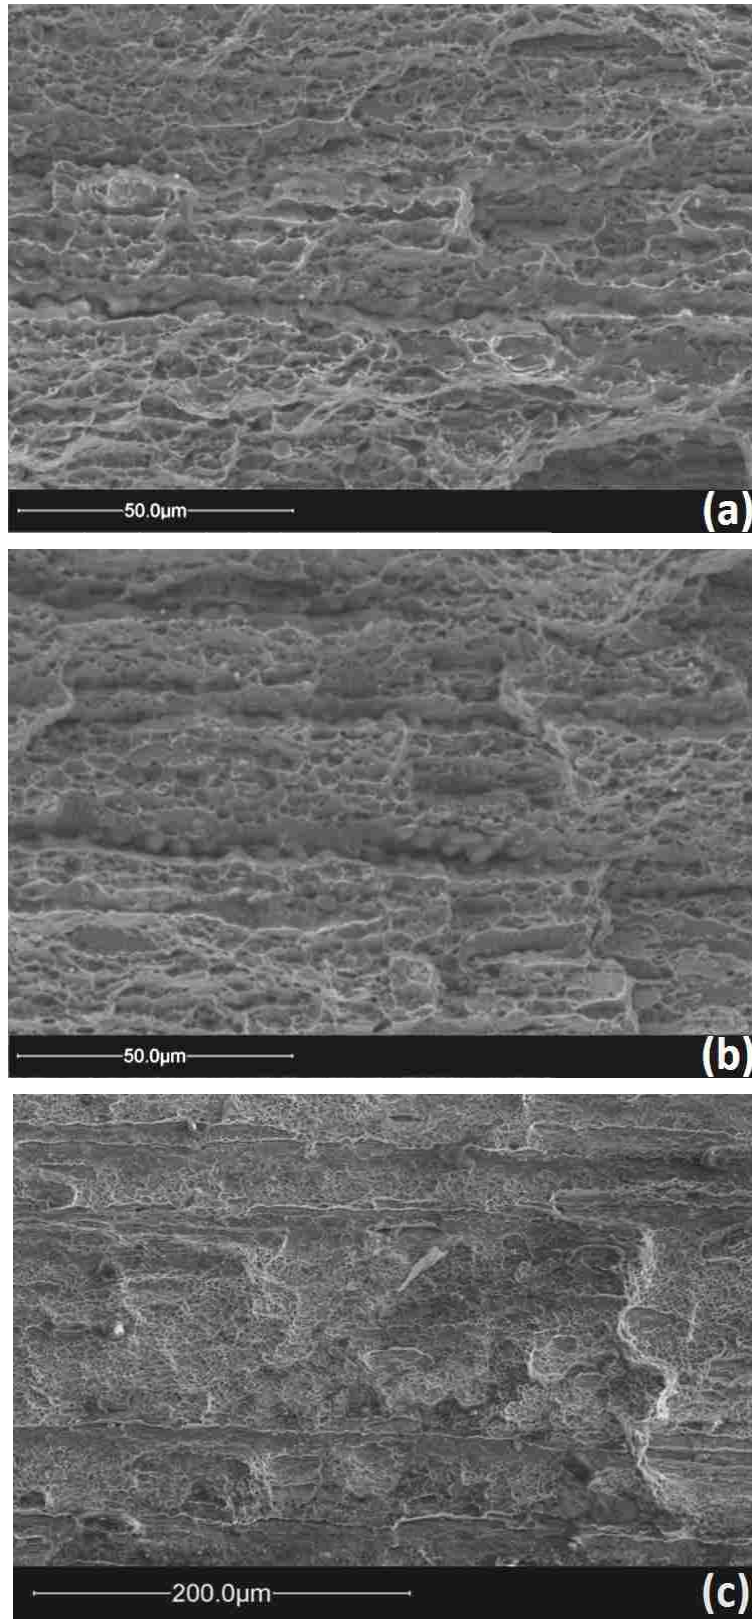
Ductile fracture in (a) DP500, (b) DP780, and (c) DP980 formed by EHF.
